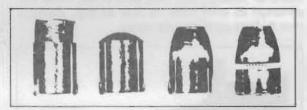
Four stages in making a swaged handgun bullet. From left, gilding metal cup with lead wire core inserted by hand; the cup and core after core seating in die; the bullet after swaging; finished bullet, complete with cannelure.
